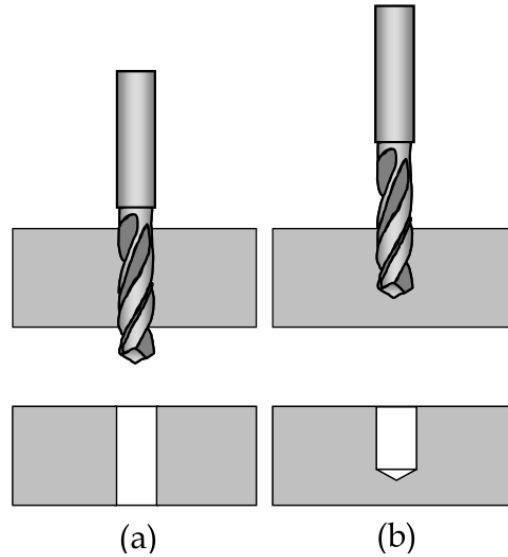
Type of holes when drilling, (a) through hole and (b) blind hole [8].
